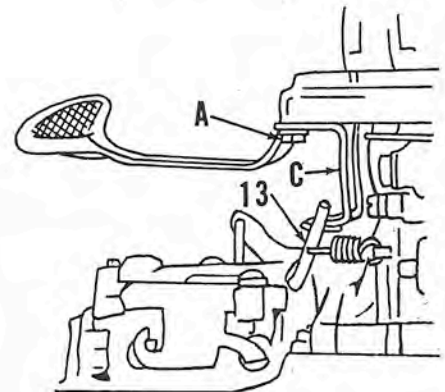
On series JW motors, cam (C) is attached to bottom of armature plate as shown. When speed control lever is moved, cam follower (13) is actuated to open carburetor throttle valve. To synchronize, loosen screws (A) and proceed as outlined in text.
